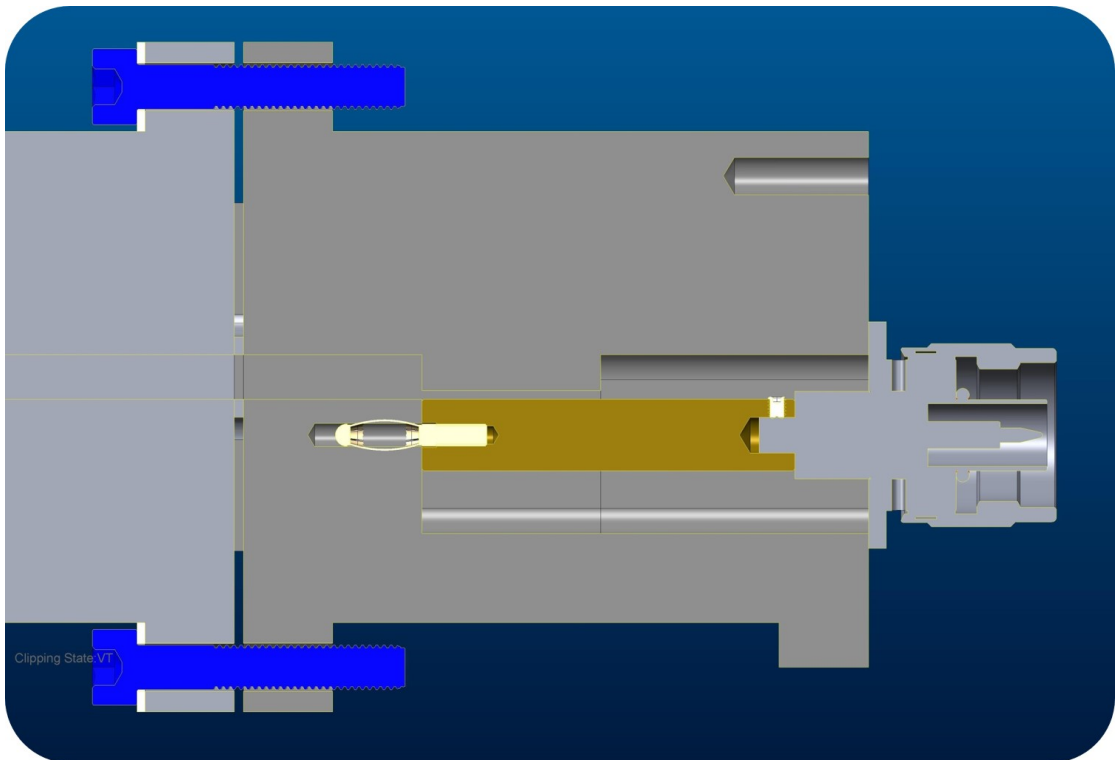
Cross sectional view of the antenna assembly attached to the DR WG and N-type connector.
